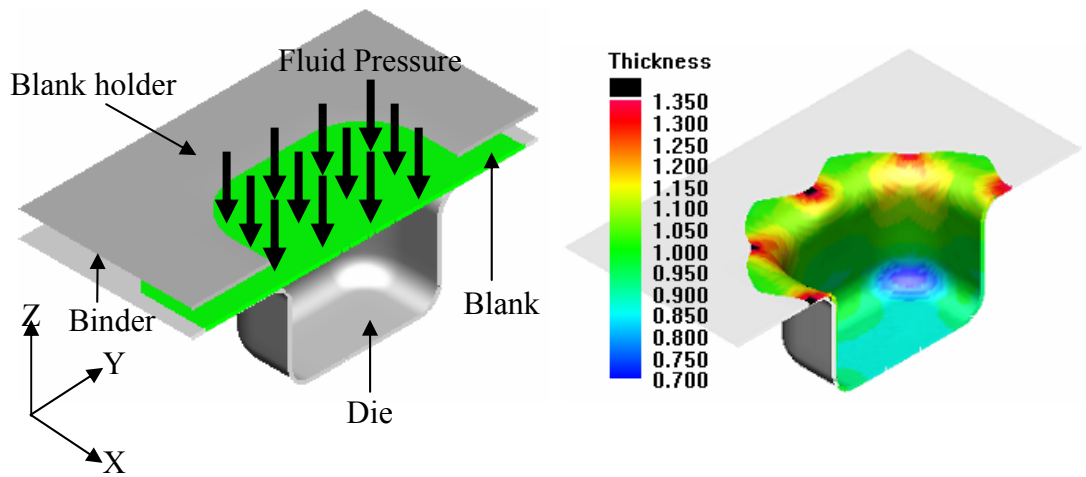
High pressure sheet metal forming simulation of square (II) cross-section, variant 1, prismatic workpiece
